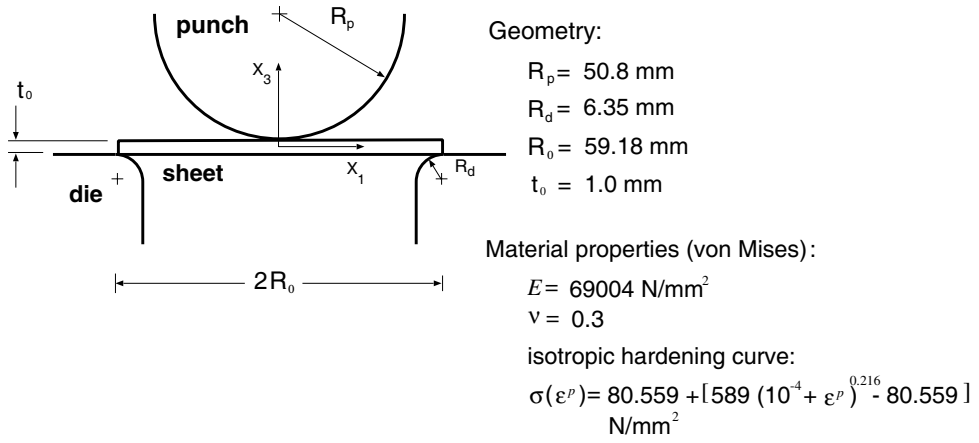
Thin sheet metal forming. Tool/workpiece configuration.
